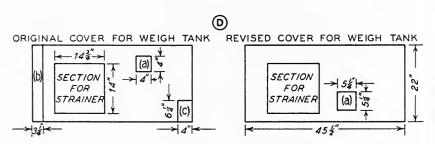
Construction details of weigh tank and strainer at Plant D
